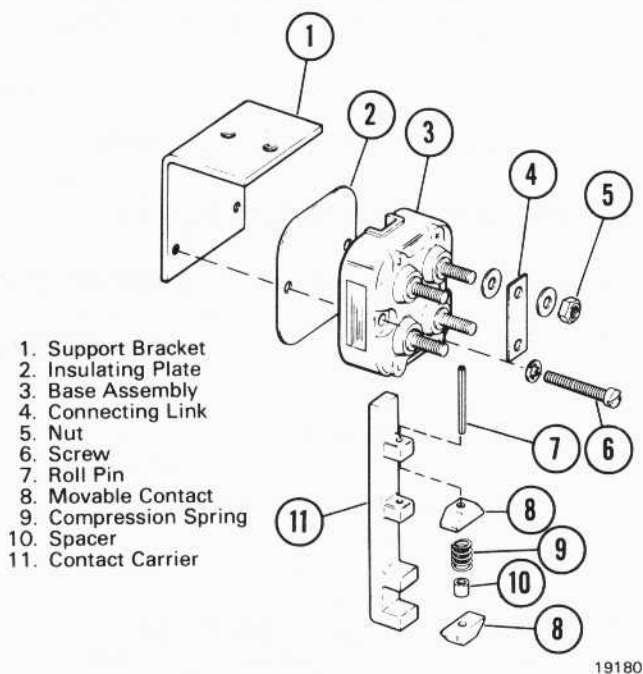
60 Ampere Auxiliary Switch, Exploded View
